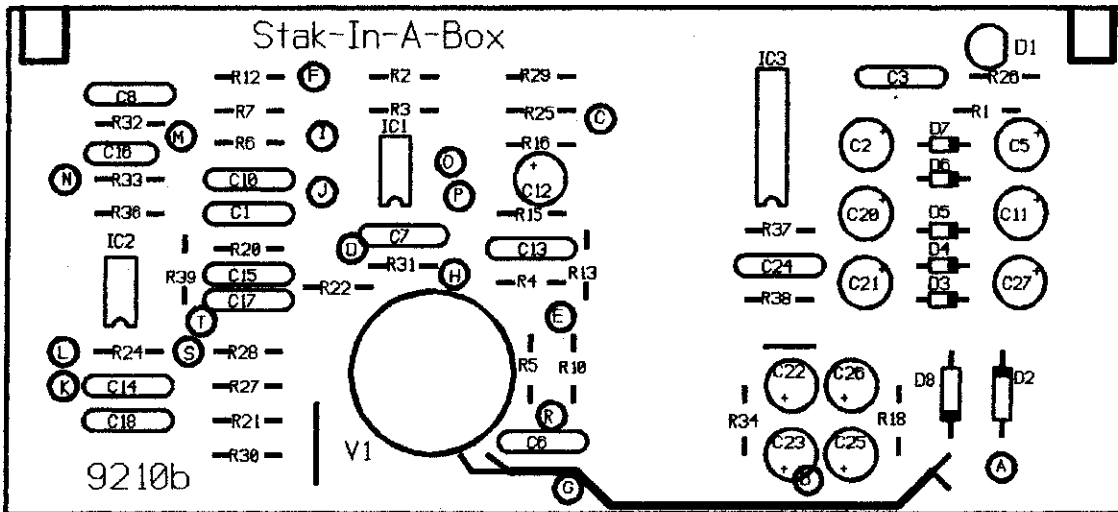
Components mount on the circuit board in the locations shown by this parts placement drawing. Note that there are two Jumpers on the board. A pair of insulated wires twisted together will be used to supply the tube's filament power as shown by the graphic from V1 to the two holes below D8.
